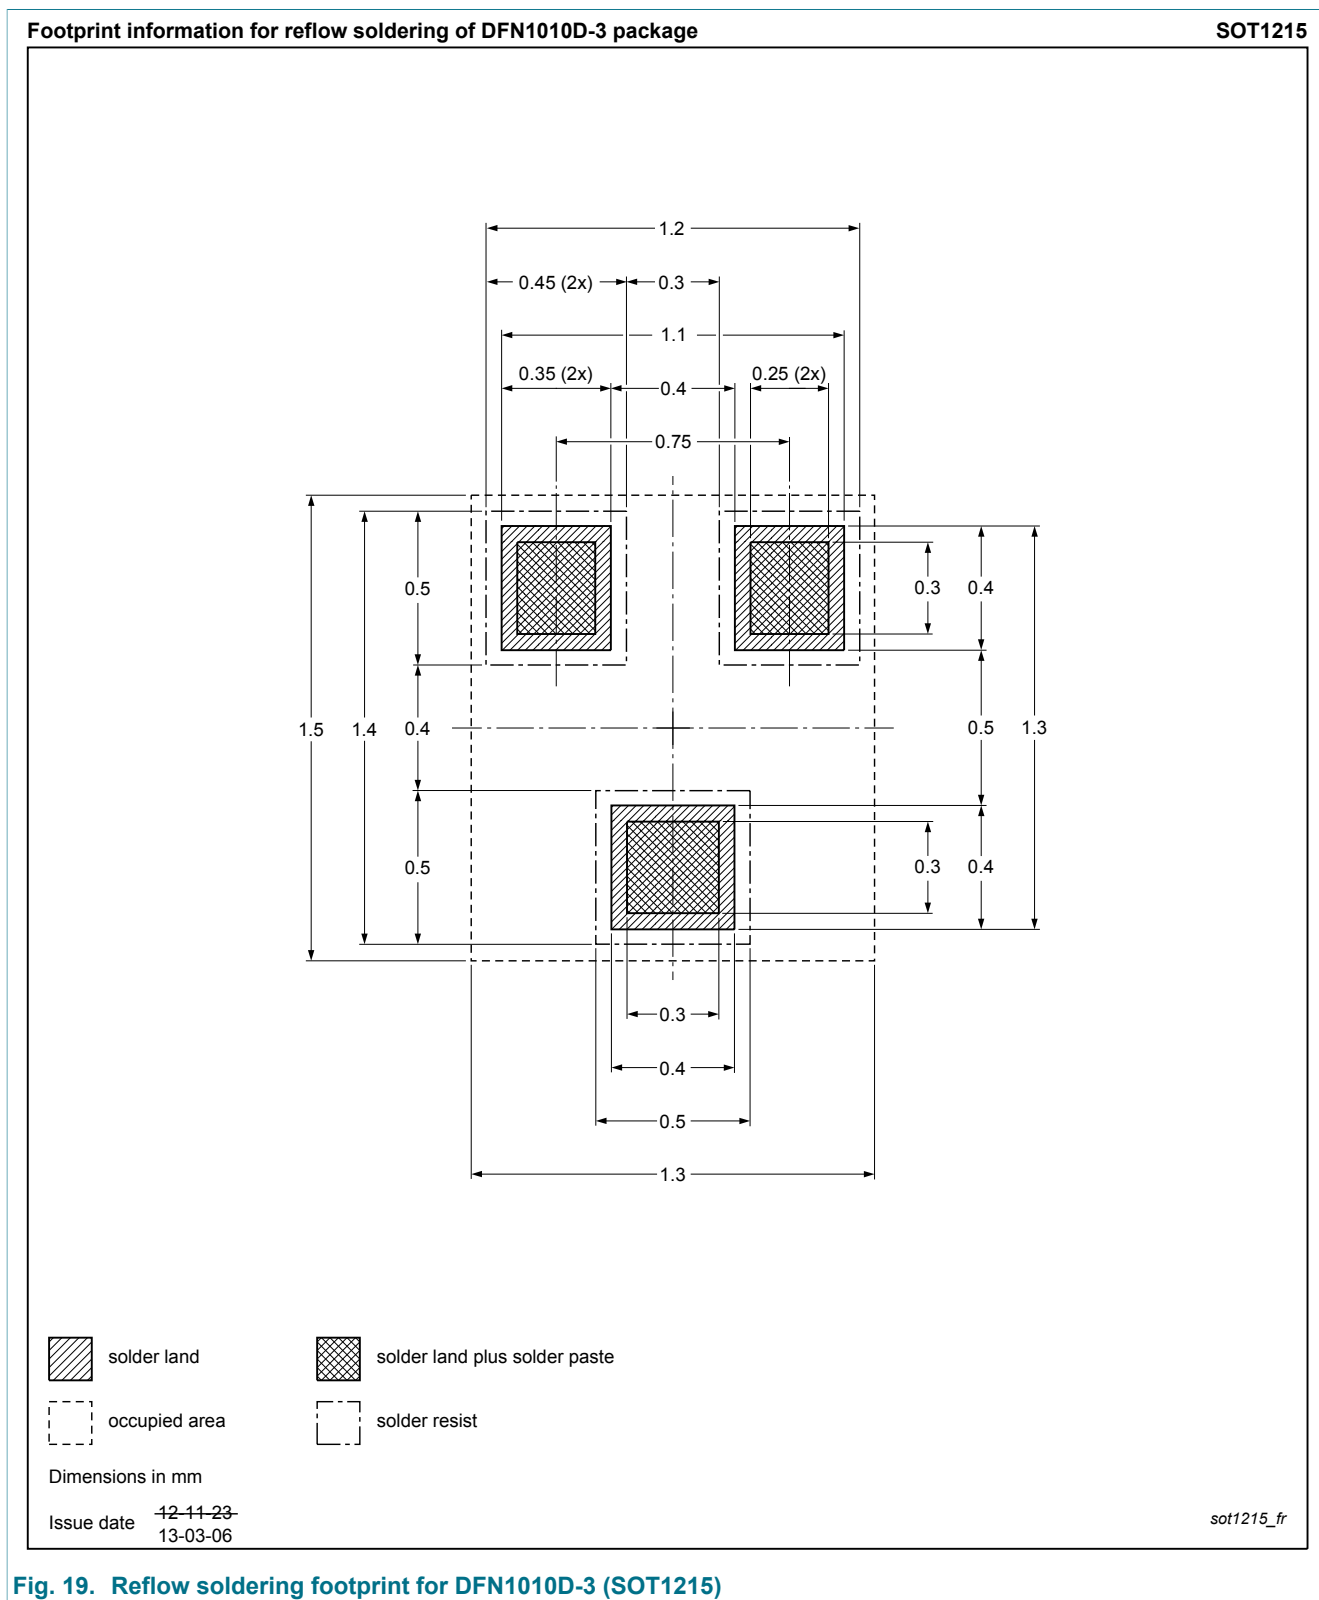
Reflow soldering footprint for DFN1010D-3 (SOT1215)
